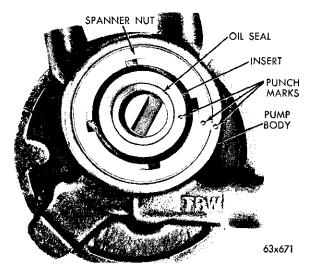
Center Punch Marks on Pump Body Spanner Nut and Front Insert
